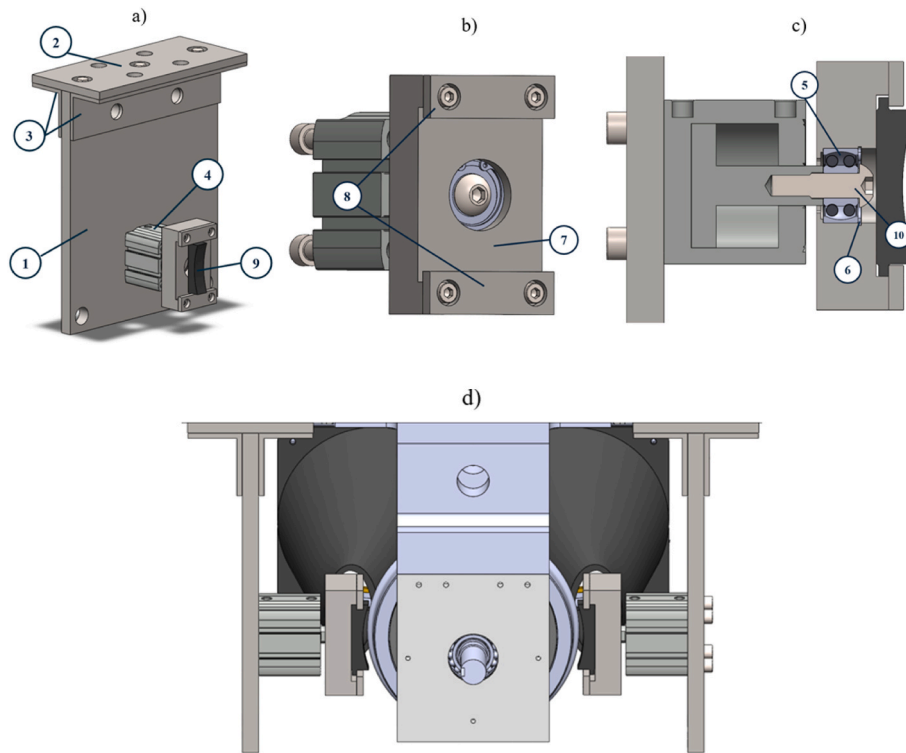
(a) CAD Model of the braking system (b) Detail of the piston and brake shoe housing (c) Cross section view of the piston and brake shoe housing. (d) Detail of the brake shoes in position. (1) Vertical plate, (2) Horizontal plate, (3) Gussets, (4) Pneumatic cylinder, (5) Self-aligning ball bearing, (6) Circlip, (7) Housing plate, (8) Small plate, (9) Brake shoe, (10) Screw.
